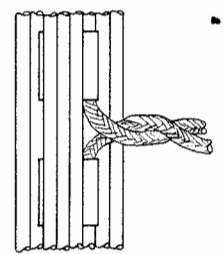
DETAIL SHOWING METHOD OF TAPING START OF WINDING AND SEQUENCE OF DOUBLE BANK WINDING.
